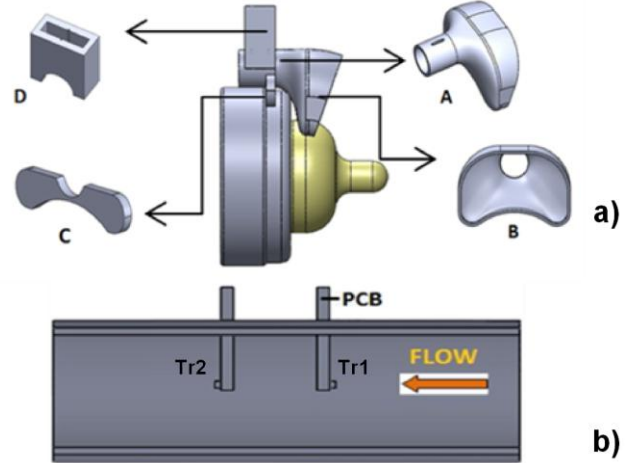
a) Assembly of mechanical components: (A) duct inserted into the air conveying system (B), (C) duct support, (D) PCBs support. b) Schematic representation of the sensing element.
